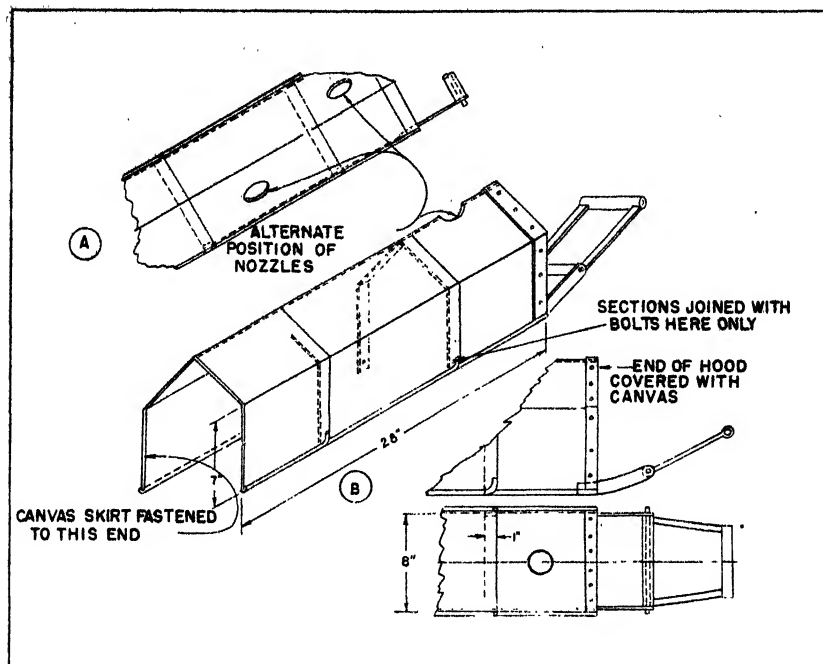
A detail drawing of the hoods used in the tests. Top view (A) shows an alternate nozzle arrangement.
